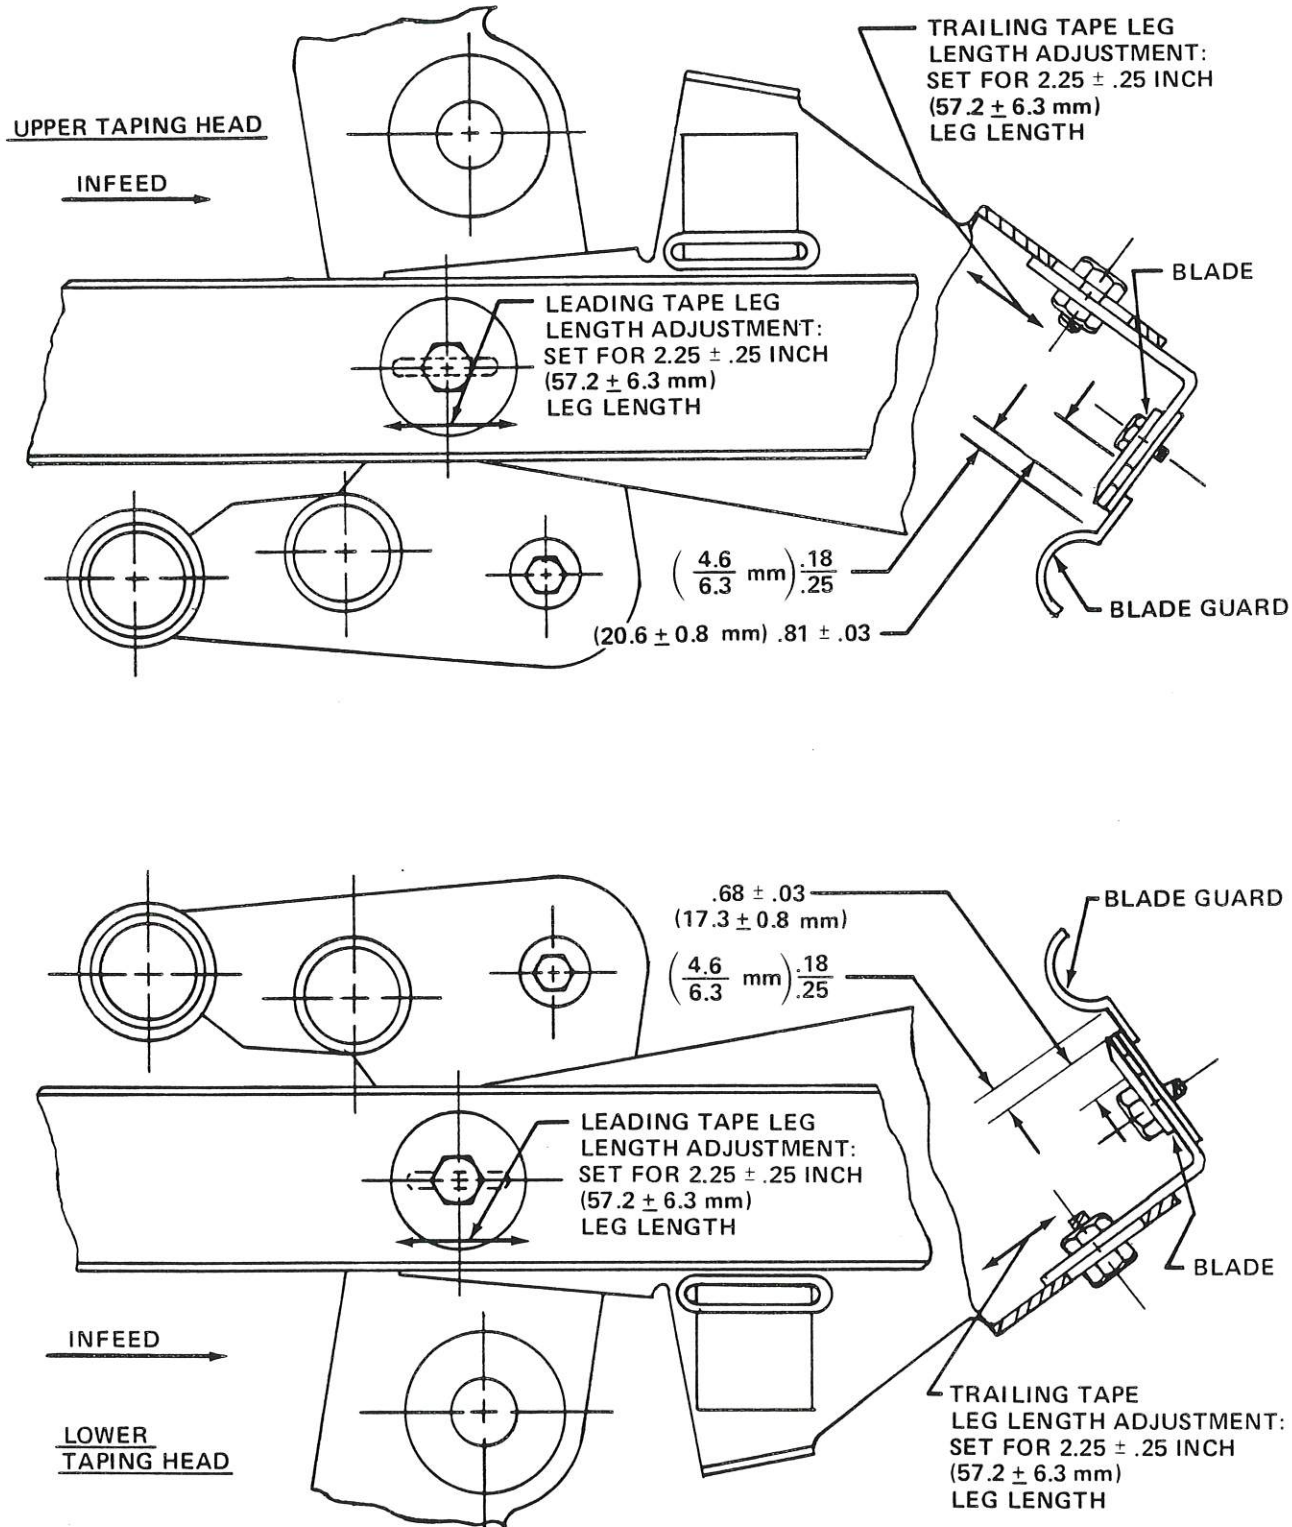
UPPER AND LOWER CUT-OFF ADJUSTMENT - RIGHT SIDE VIEW
